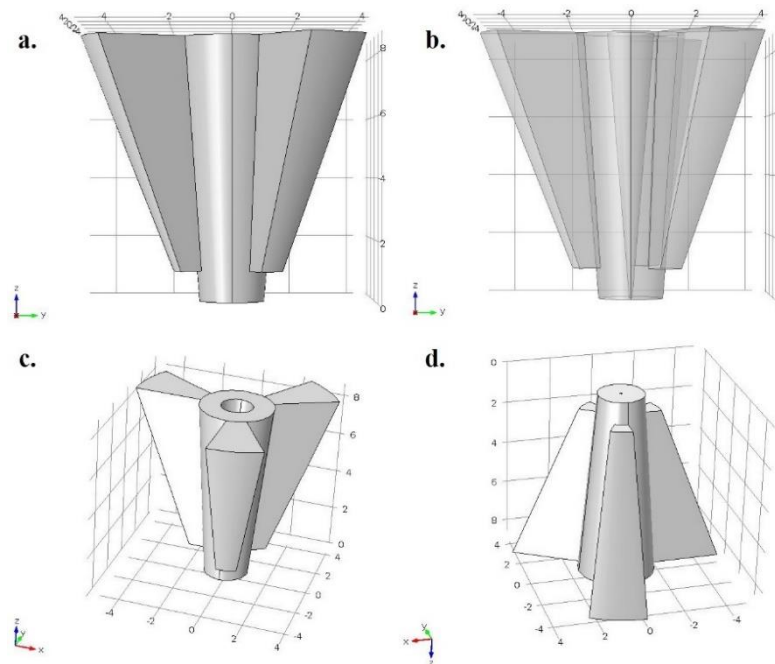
Schematic illustration of inner part of full length spinneret prototype 2, (a. solid front view, b. transparent front view, c. inclined top view, d. inclined bottom view)
